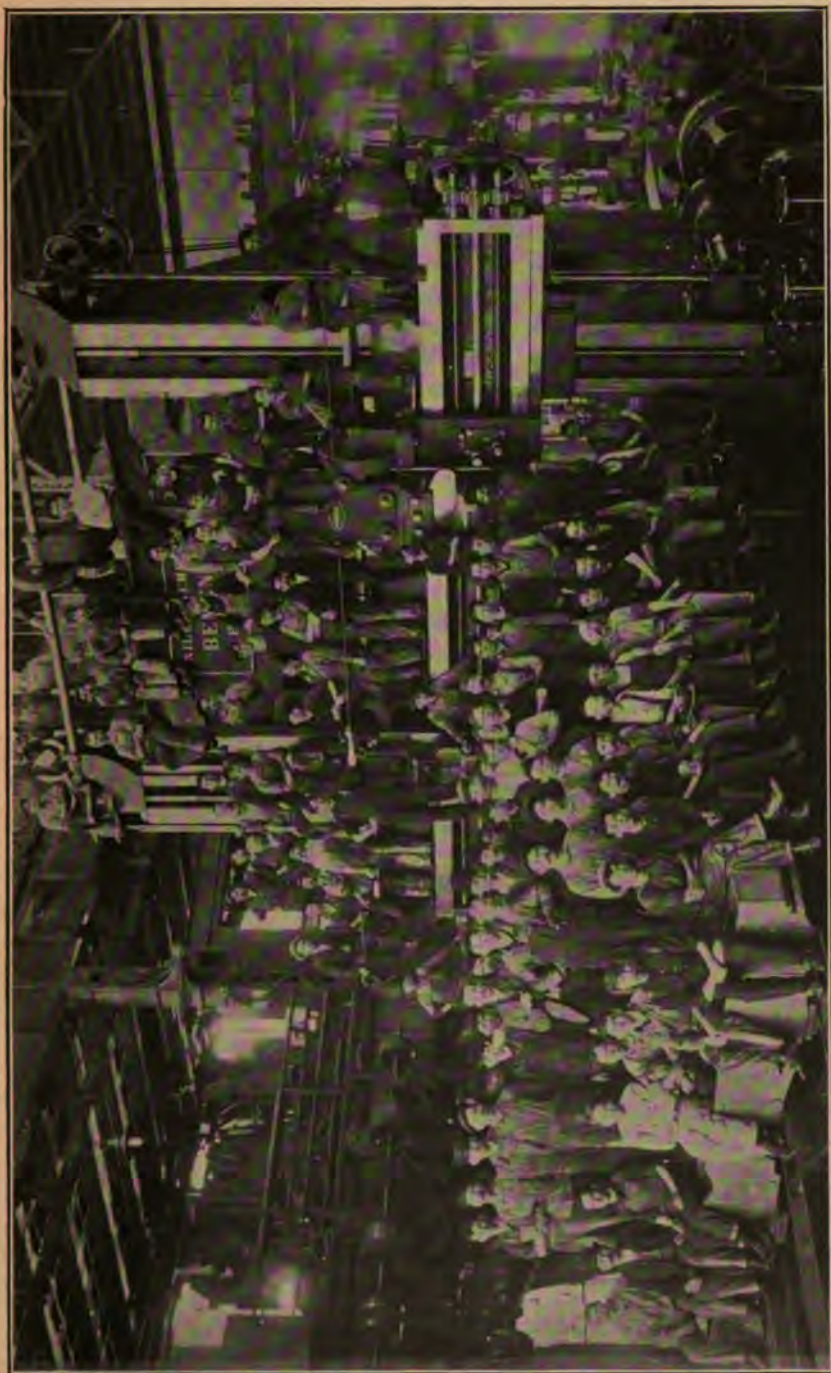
An immensely large plating machine. Weight, 845,000 pounds. Five separate motors, with an aggregate of $207\frac{1}{2}$ horse-power, operate this goliath, the main drive being by a 100 horse-power motor.
